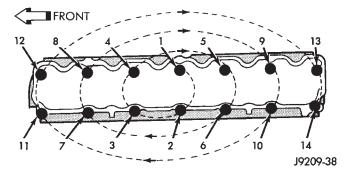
Engine Cylinder Head Bolt Tightening Sequence
